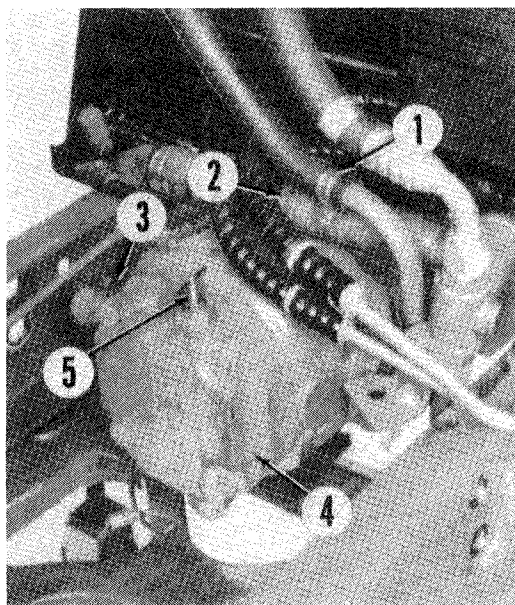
Main hydraulic pump is mounted in front of radiator and is driven by engine crankshaft through a coupler. Front end must be moved forward to remove pump.
